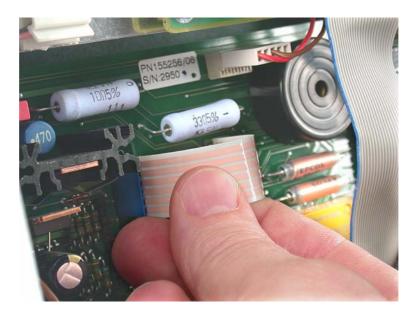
Removing a ribbon cable to a P&T-knob encoder
